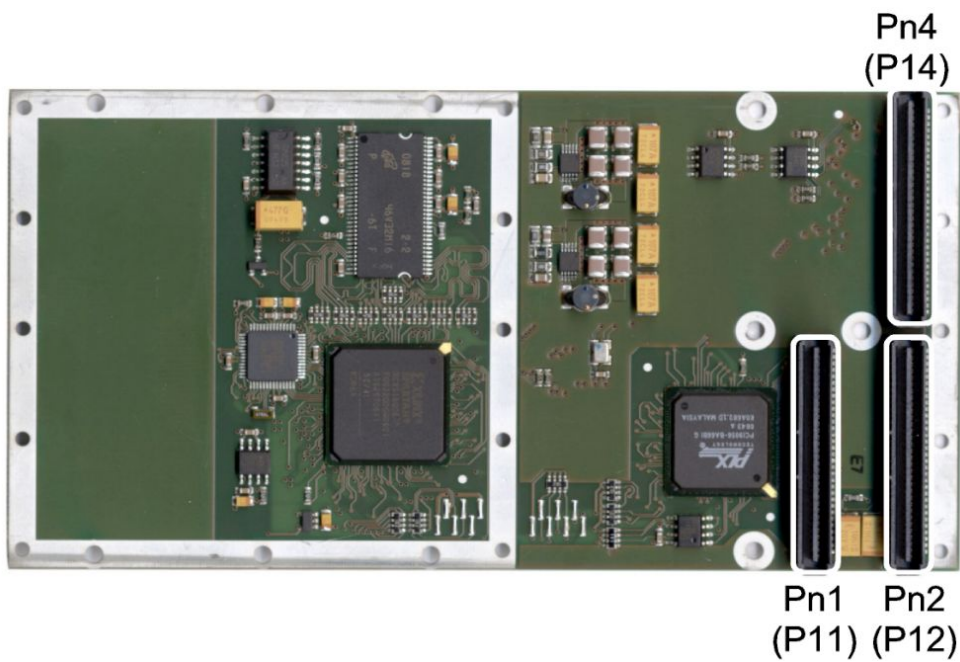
Top view of PMC-CAN/400-4-CC facing the carrier board
